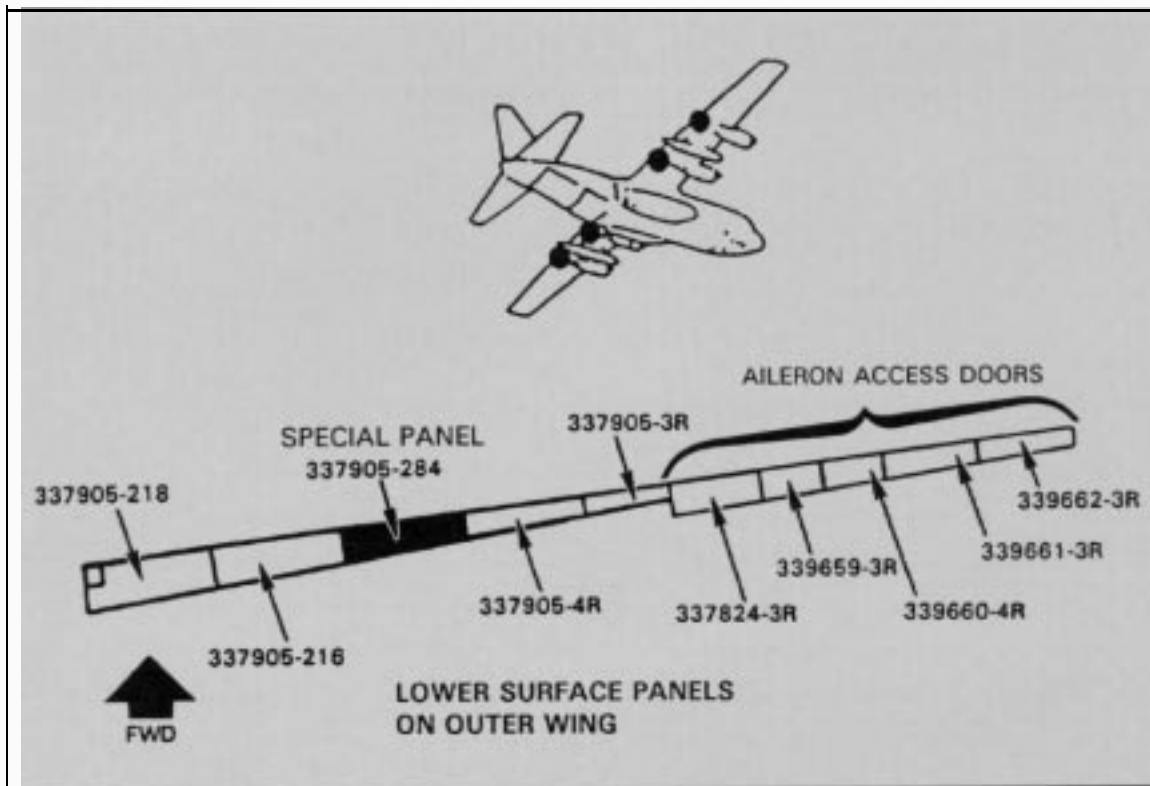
Similar riveted panels of corrosion-resistant 2219-T81 aluminum alloy are also used at critical locations in the outer wing.
